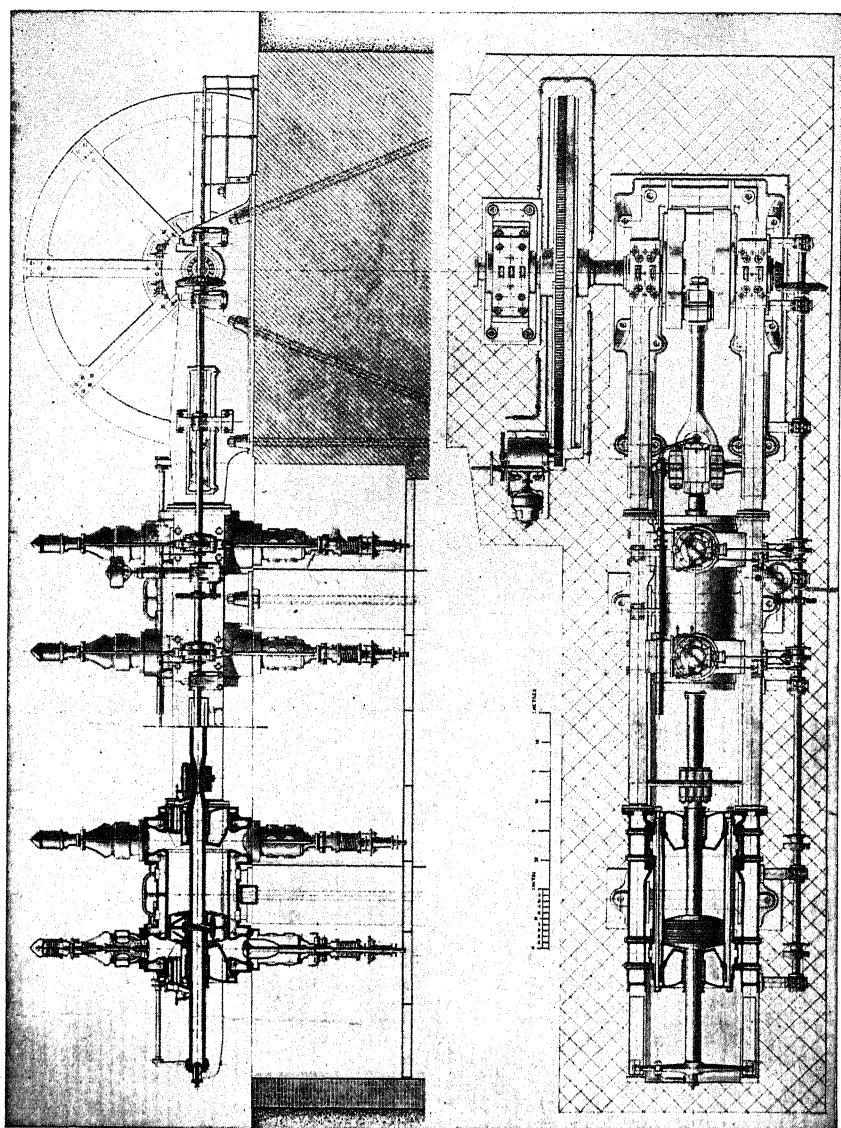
VALVE ARRANGEMENT OF THE COCKERILL ENGINE.
